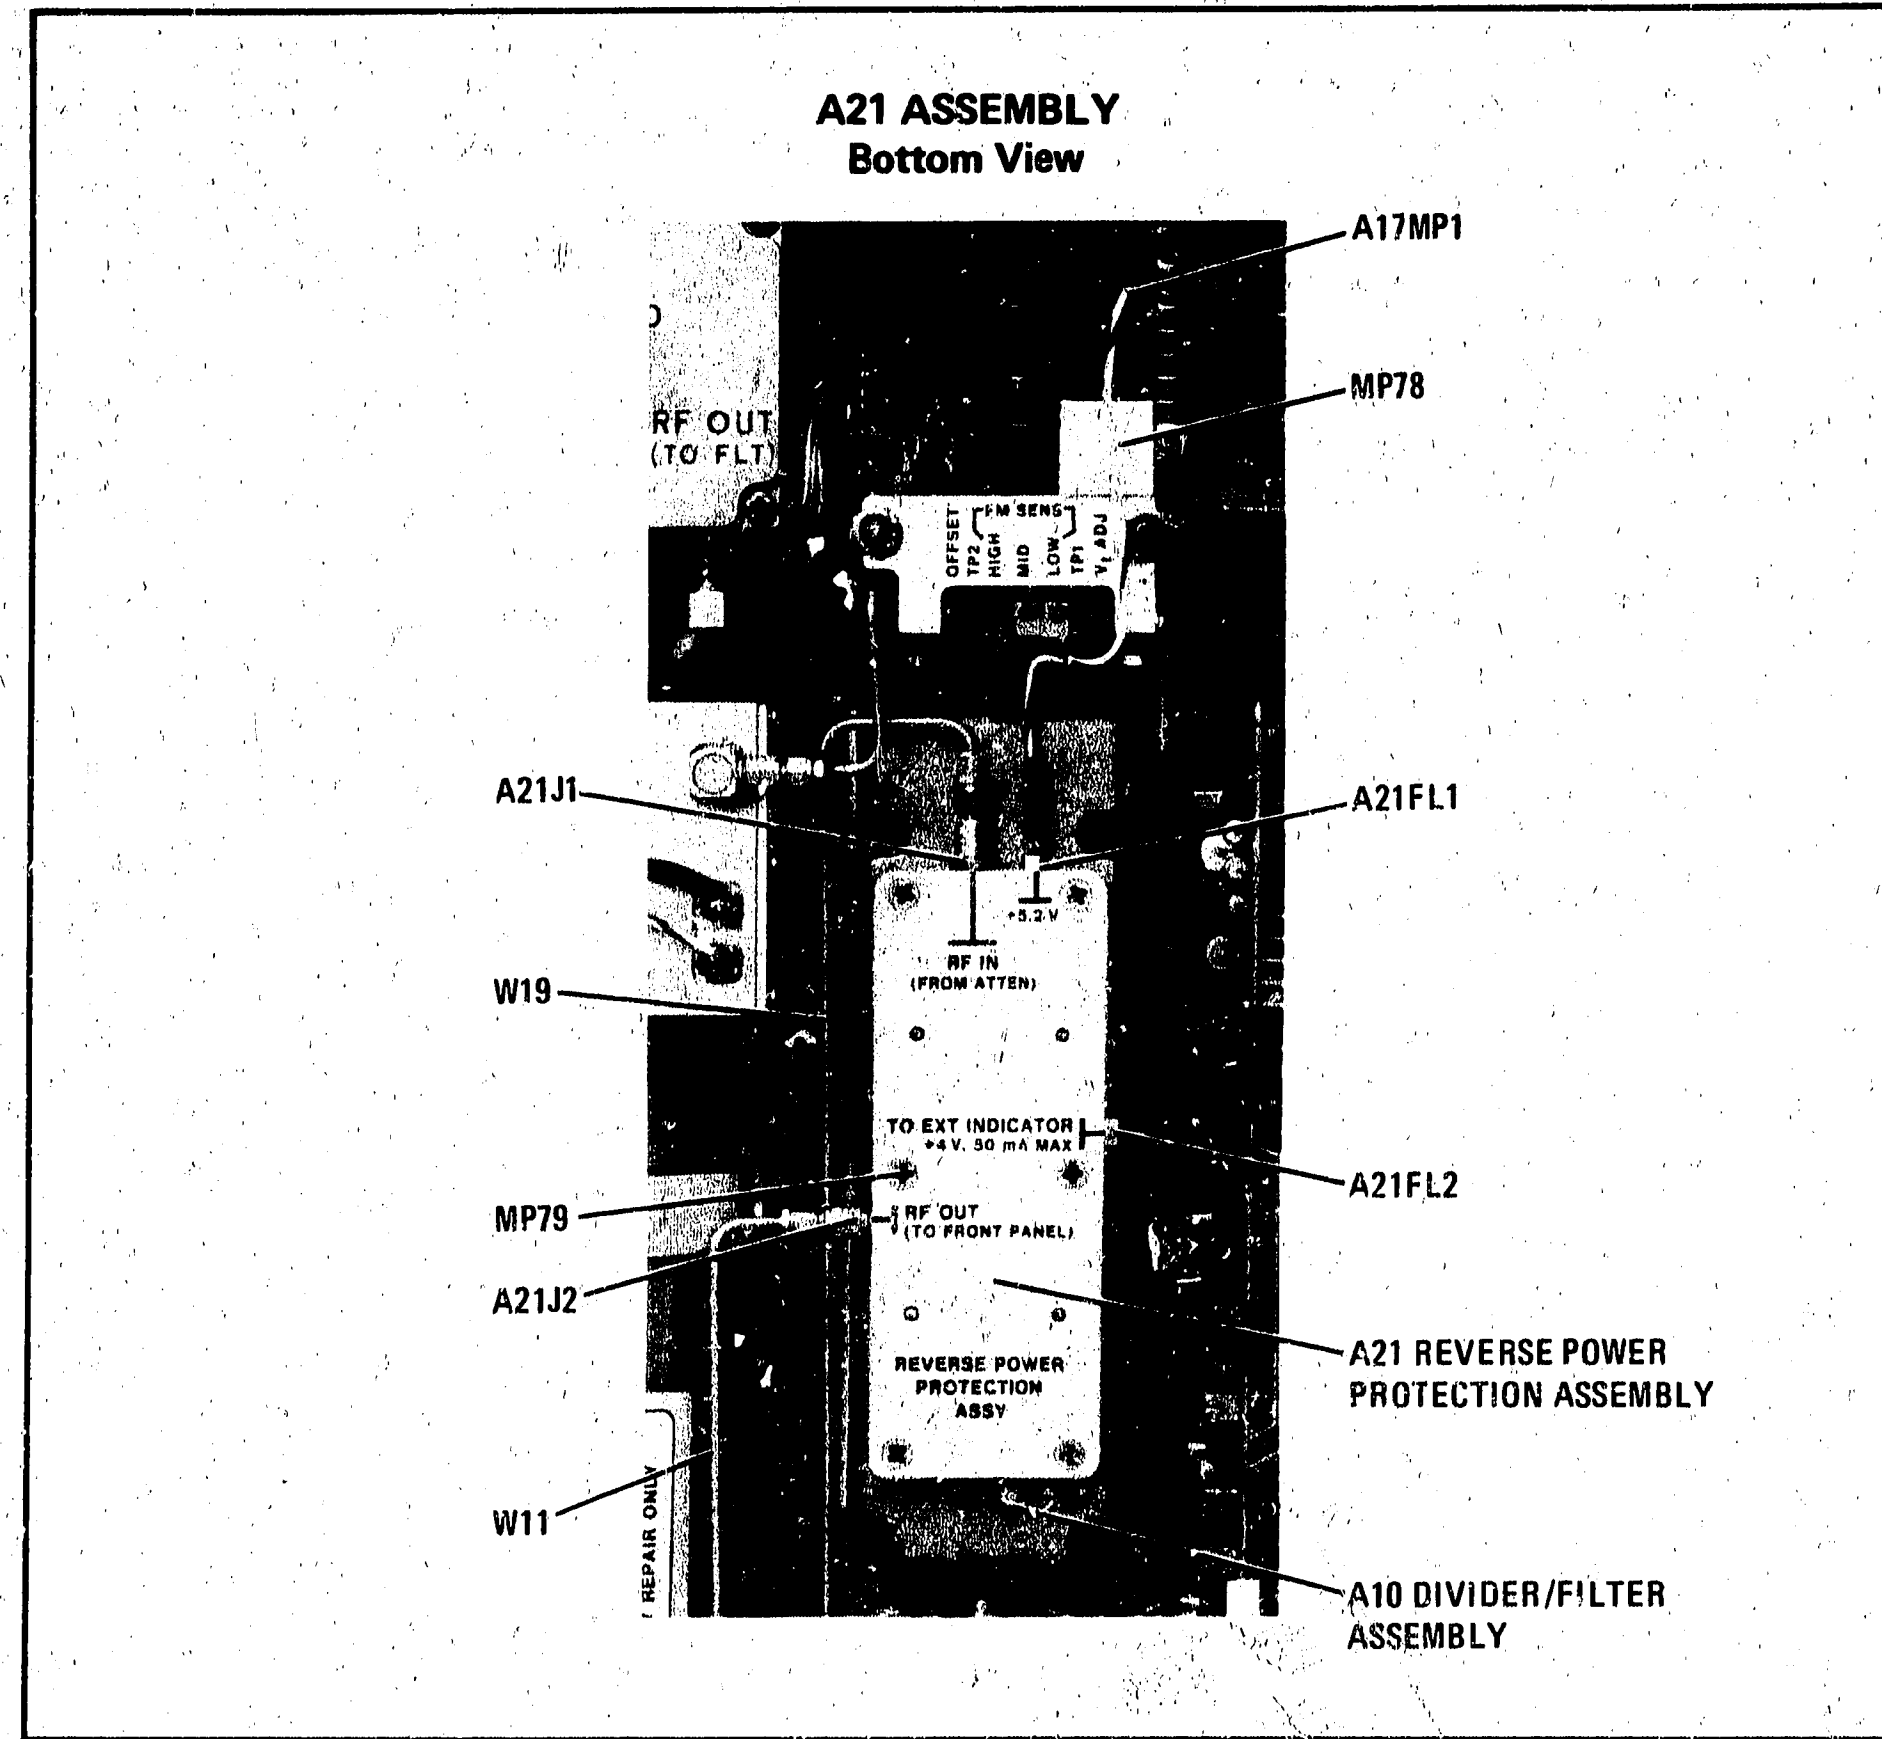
A21 Reverse Power Protection Assembly, Bottom View
